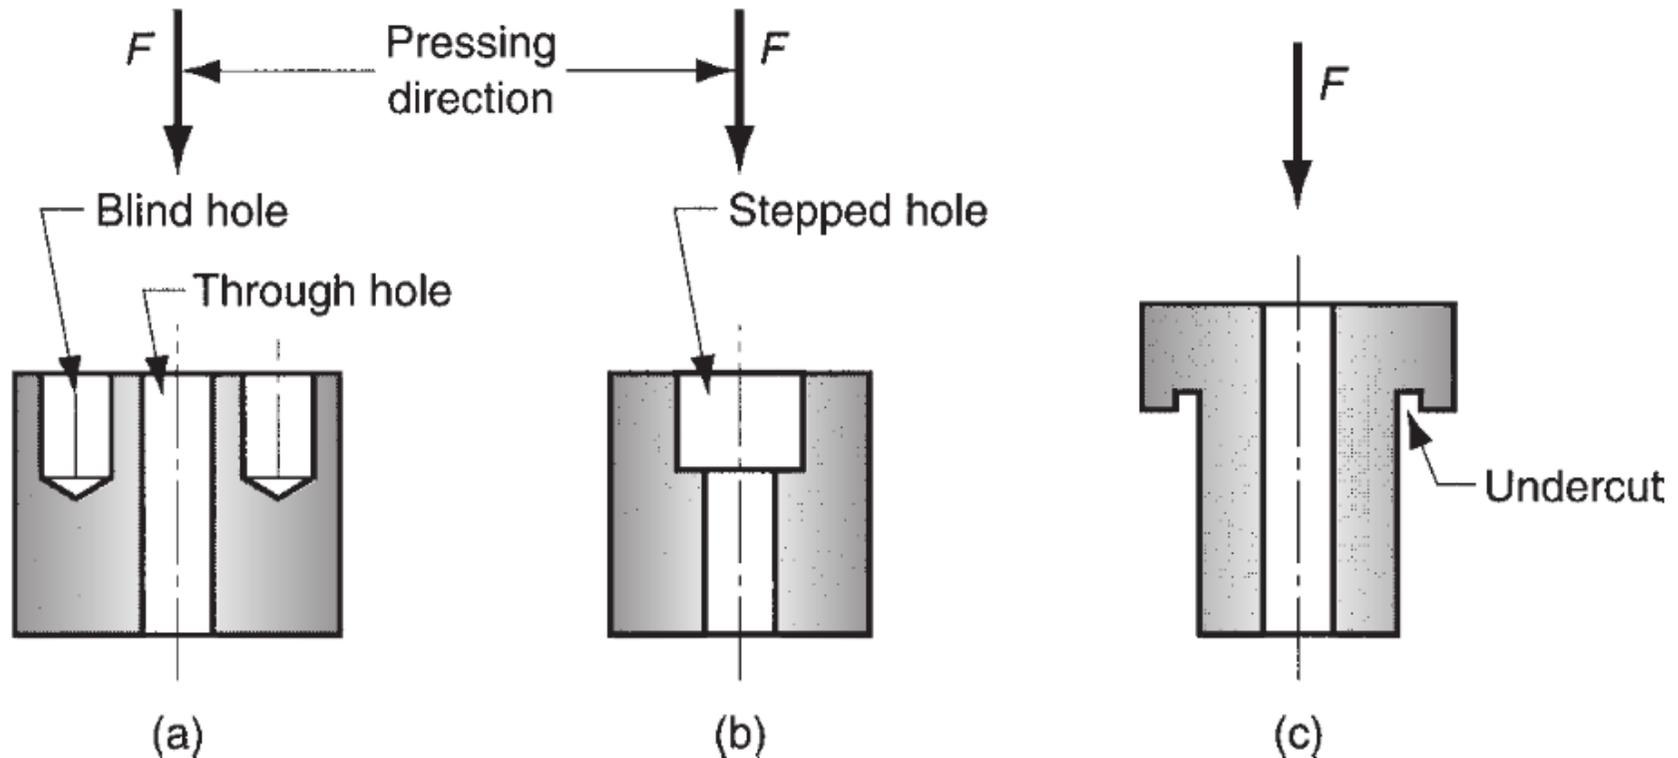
Permissible part features in PM: (a) vertical hole, blind and through, (b) vertical stepped hole, and (c) undercut in vertical direction. These features allow part ejection.
